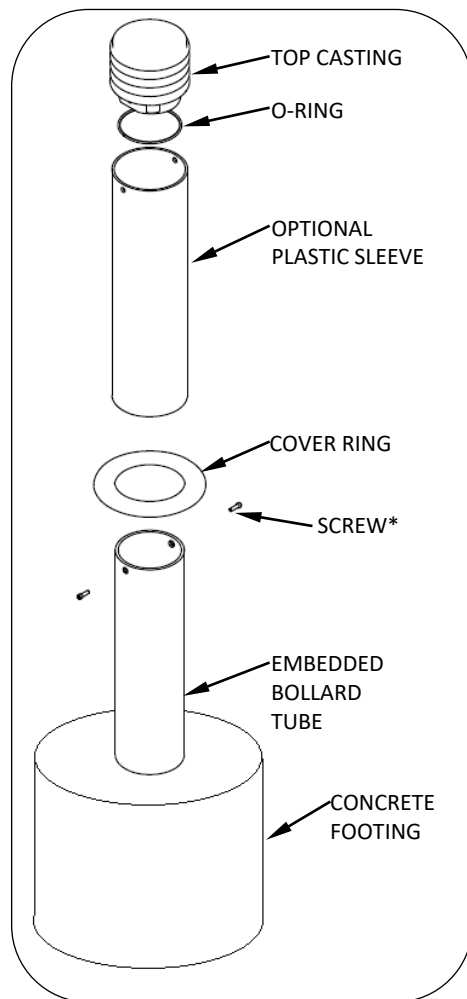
EMBEDDED BOLLARD ASSEMBLY
